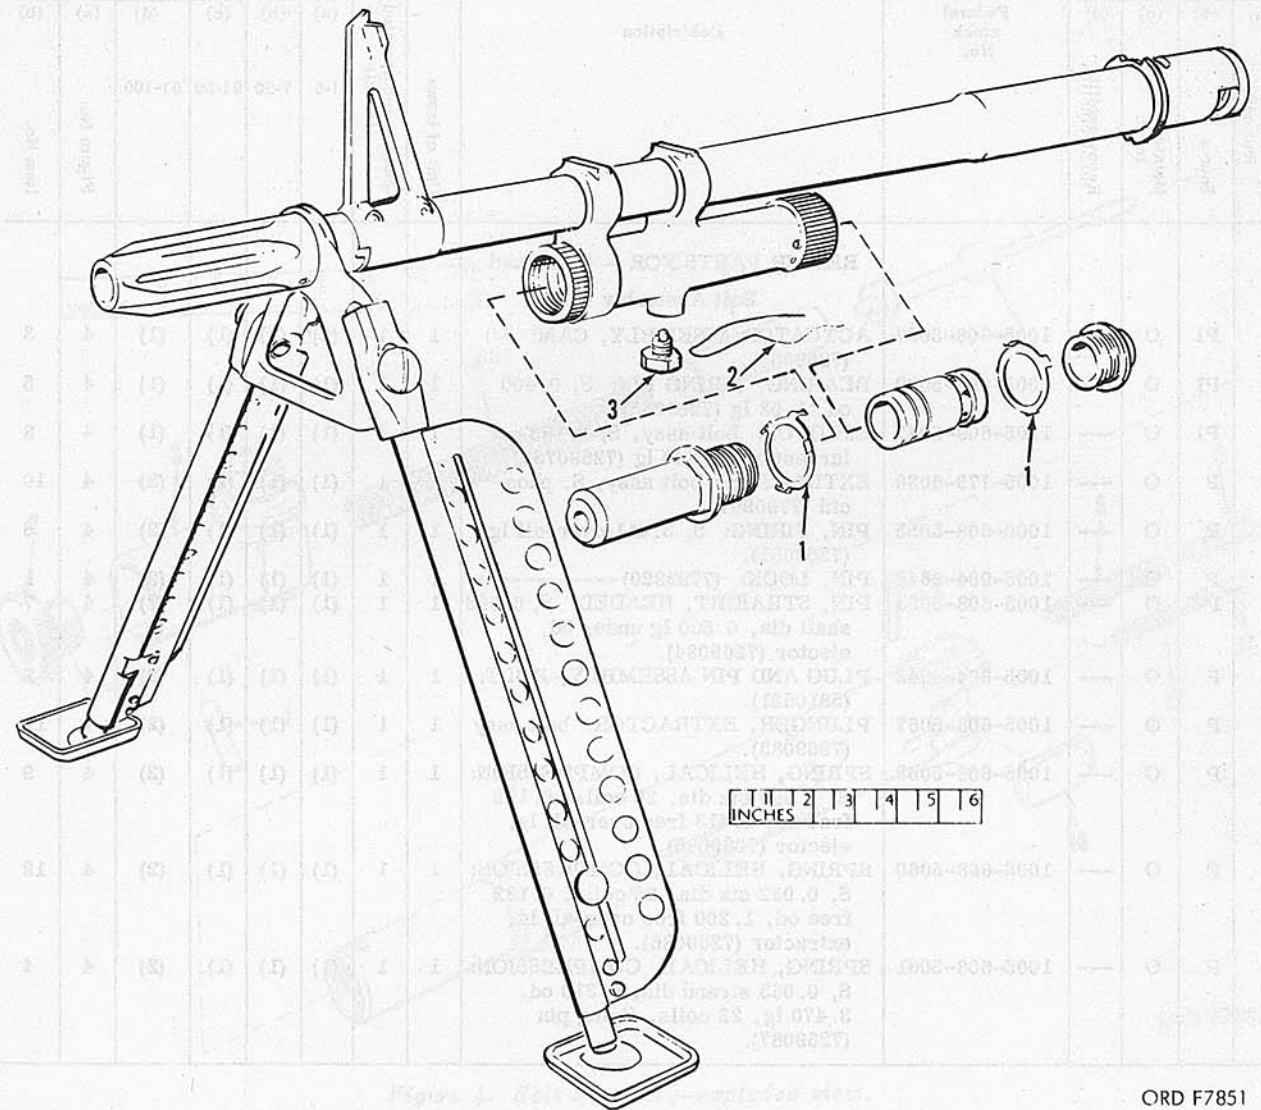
Barrel assembly with bipod assembly—partial exploded view.
